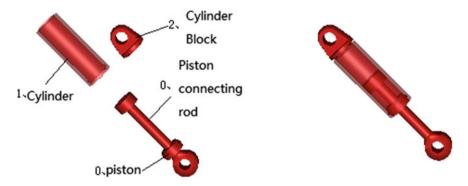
Plan for the height adjustment cylinder assembly of the cutting department
